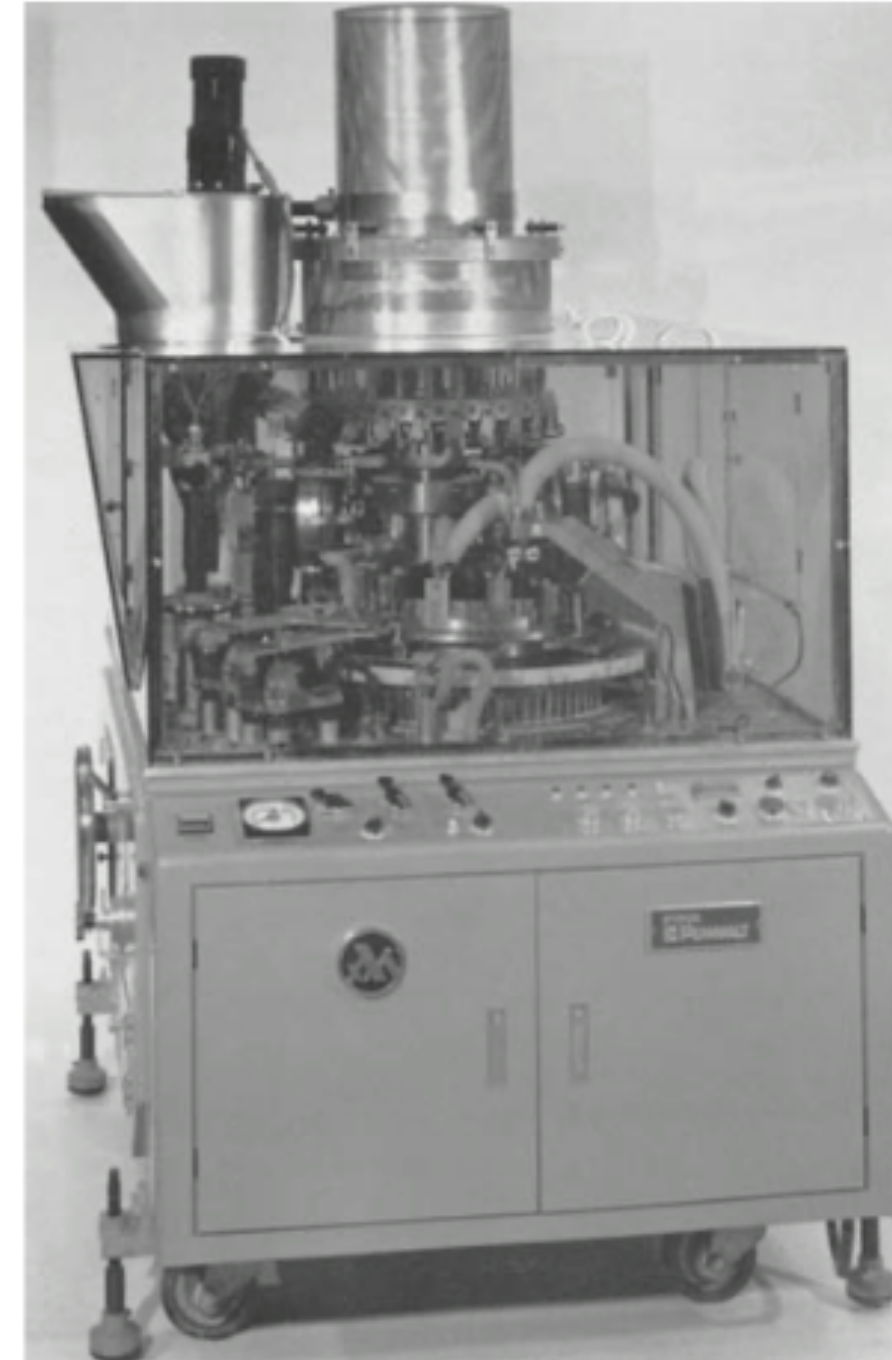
Osaka Automatic Capsule Filler model R-180, capable of filling up to 165,000 capsules per hour. (Courtesy of Sharples-Stokes Division, Stokes-Merrill, Pennwalt Corporation.)
